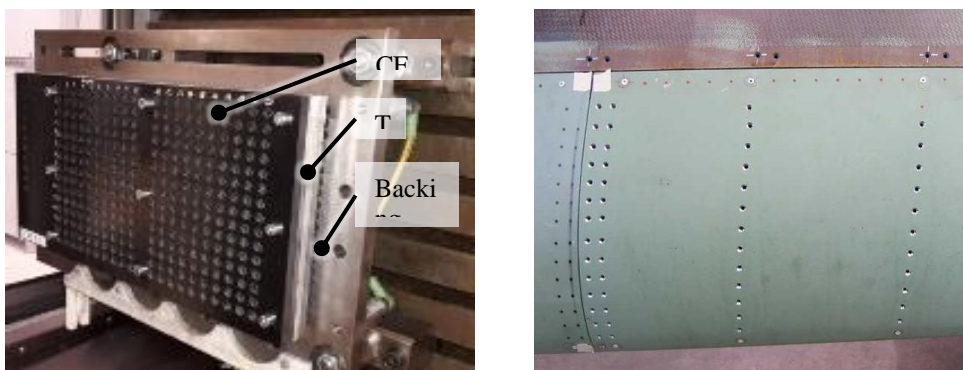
Material stack on mounting plate (left) and comparison to actual component (leading edge of wing) [27] (right)
